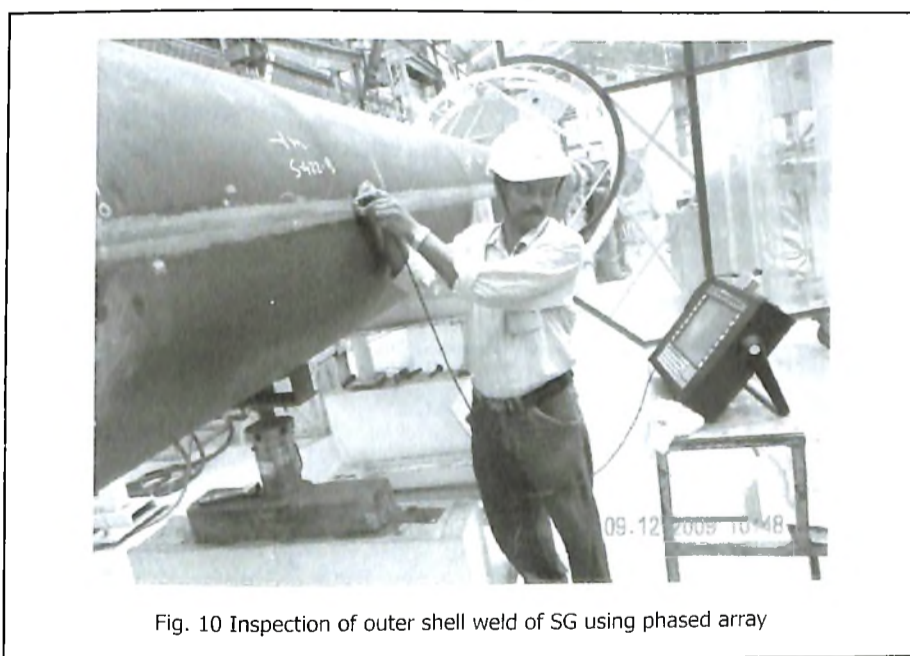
Inspection of outer shell weld of SG using phased array
